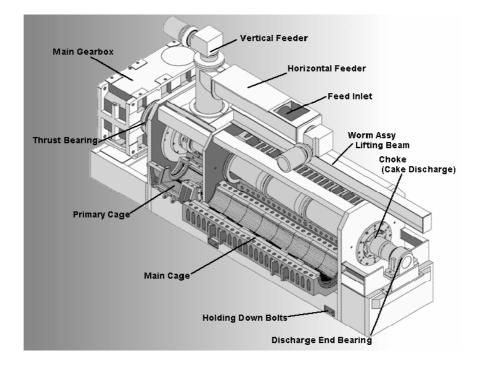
Detailed Drawing of Screw Press Manufactured by Rosedowns [37]
